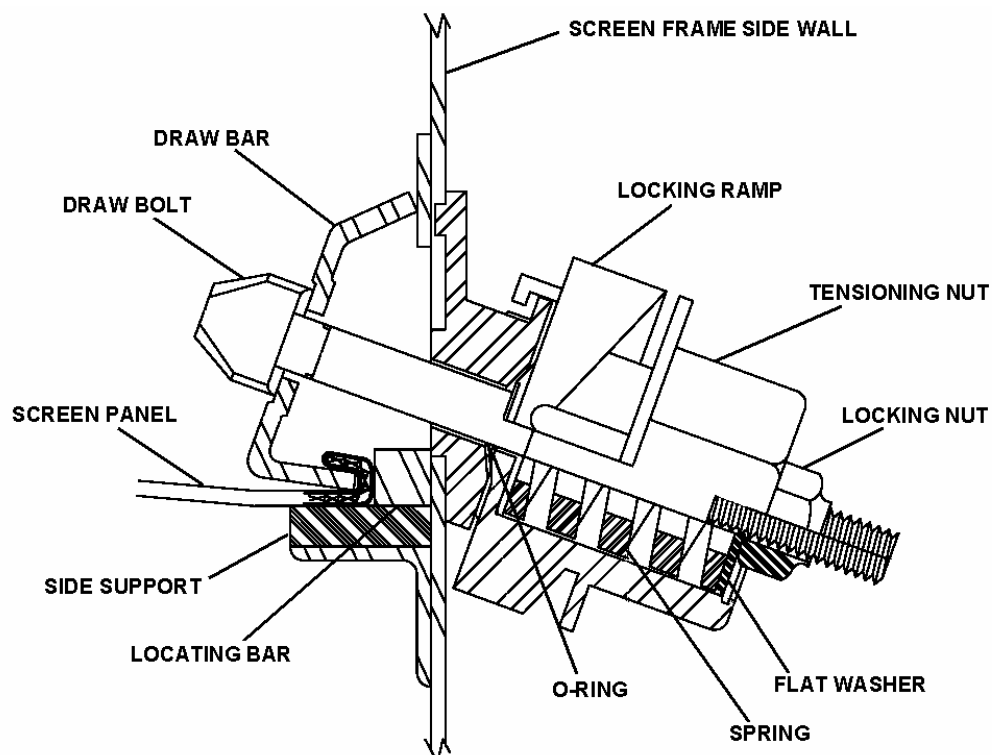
Ramp-Lok® Draw Bolt Assembly Components
